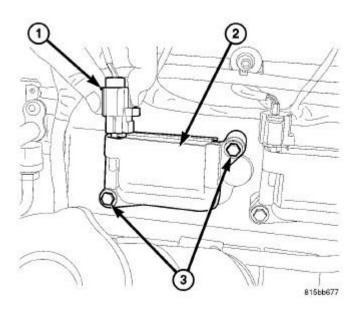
Ignition Coil Mounting Bolts Courtesy of CHRYSLER LLC
